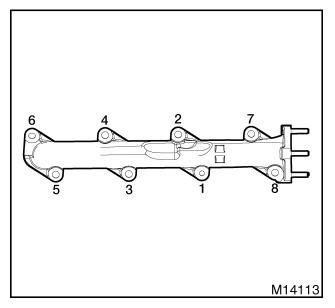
Torque sequence for left exhaust manifold mounting bolts
